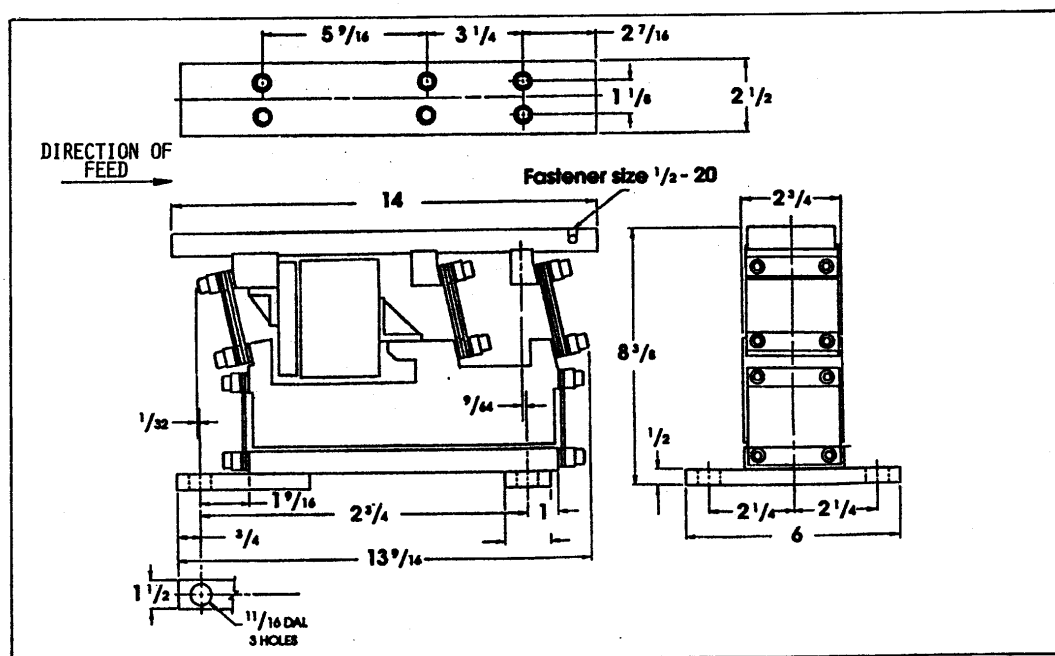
LD-8 OUTLINE DIMENSIONS
